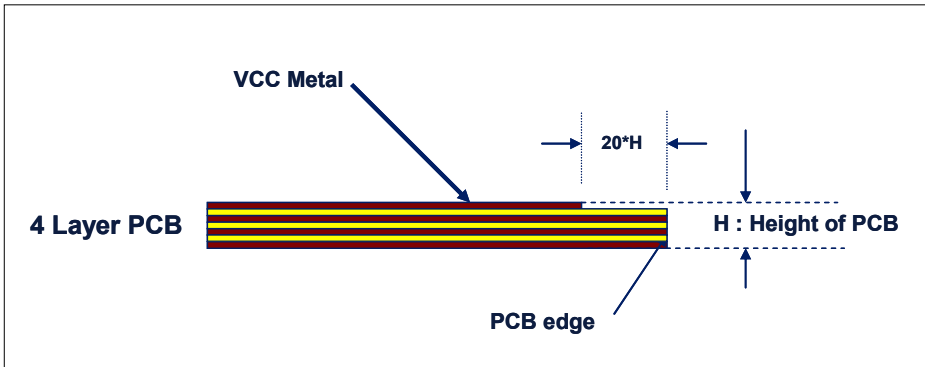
Removing metal of power plane from the edge of PCB ($20 \cdot H$ -method)
